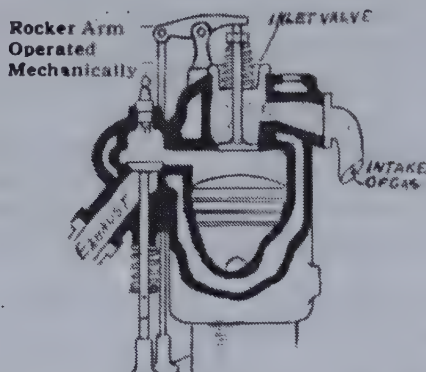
"Overhead Rocker Arm". Both inlet and exhaust "mechanically" operated.
